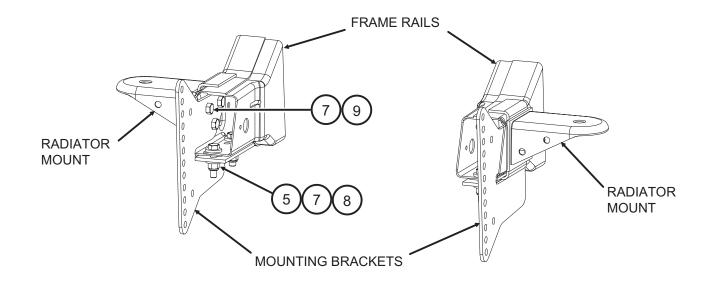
FRAME, RADIATOR MOUNT AND MOUNTING BRACKETS
